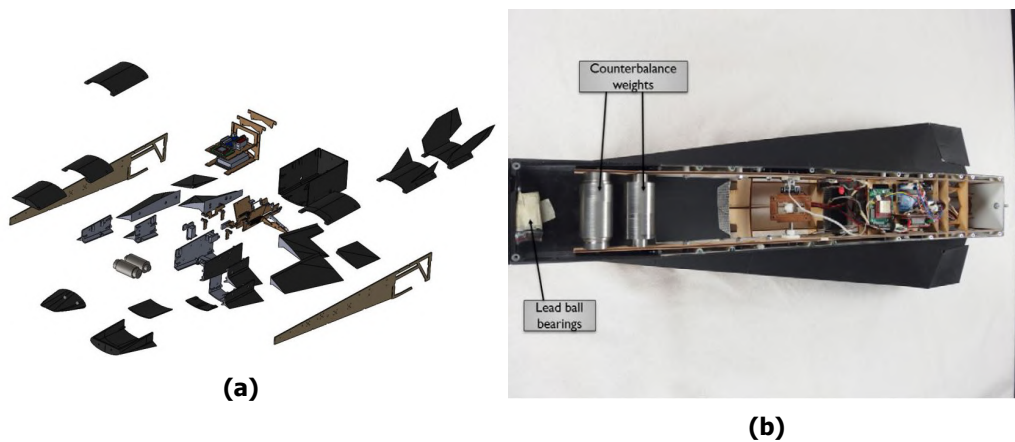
(a) Exploded view of complete CAD model (fasteners hidden for clarity) and (b) Model showing fully installed internal components
